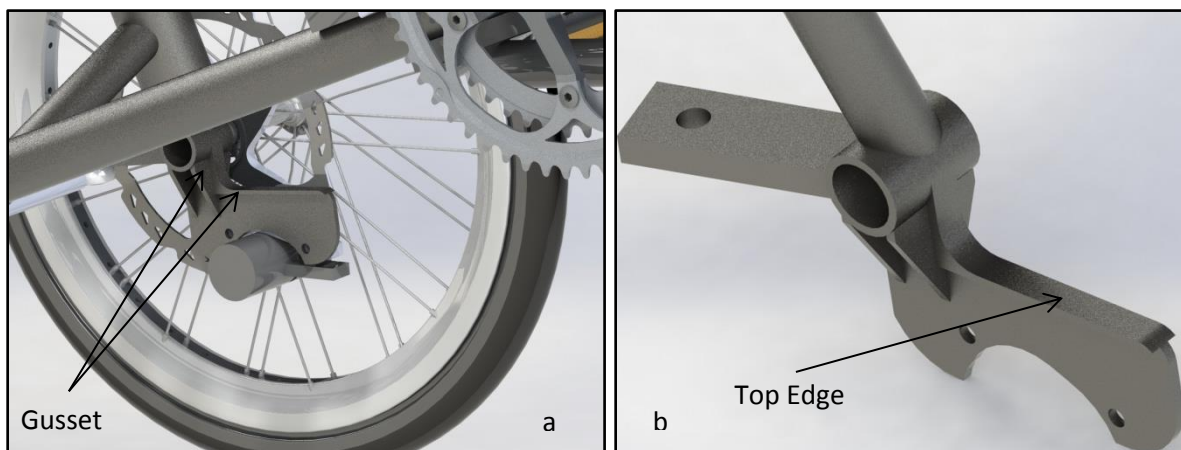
a) New design of the brake mounts with gussets implemented onto the vehicle. b) Isometric view of mount brake showing a greater thickness than the 1/8 inch top edge of the brake mount.
